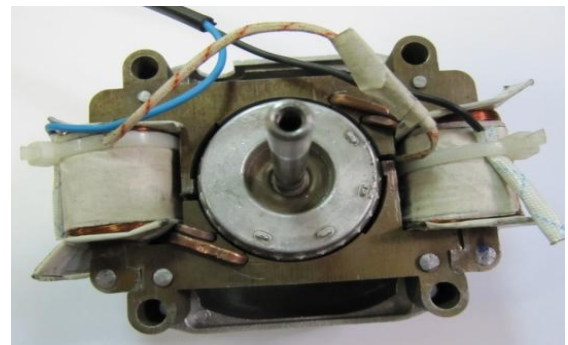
Close-up view of the motor after stator-rotor assembly in the aluminum bottom part of the frame
